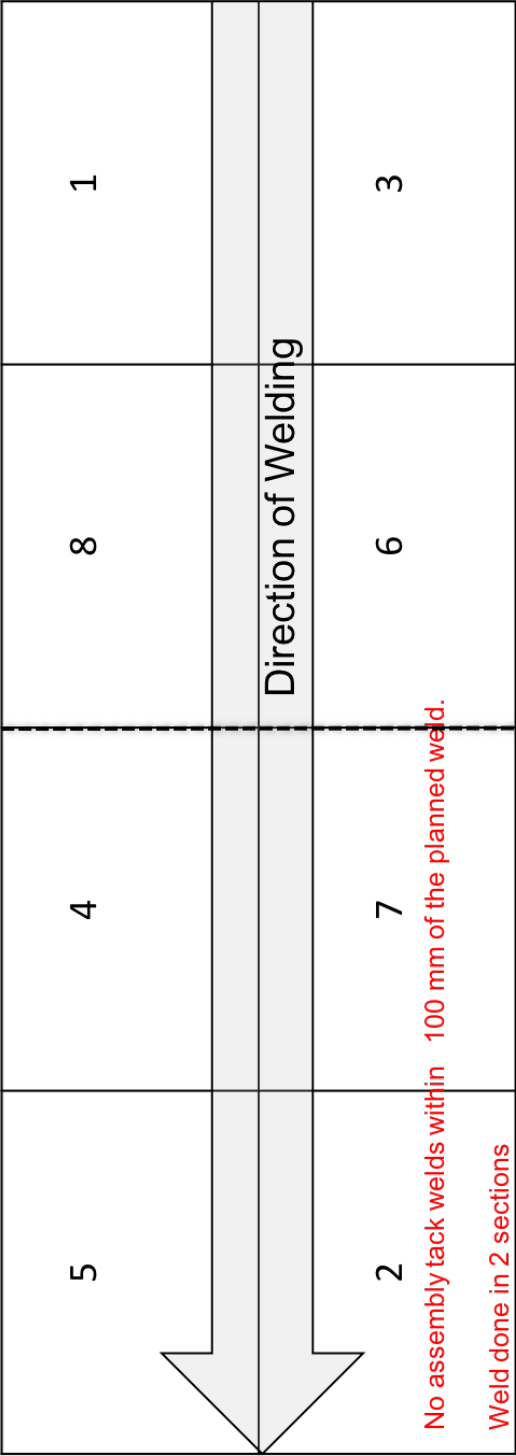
Assembled weld panel; the panel was welded in two sections.
